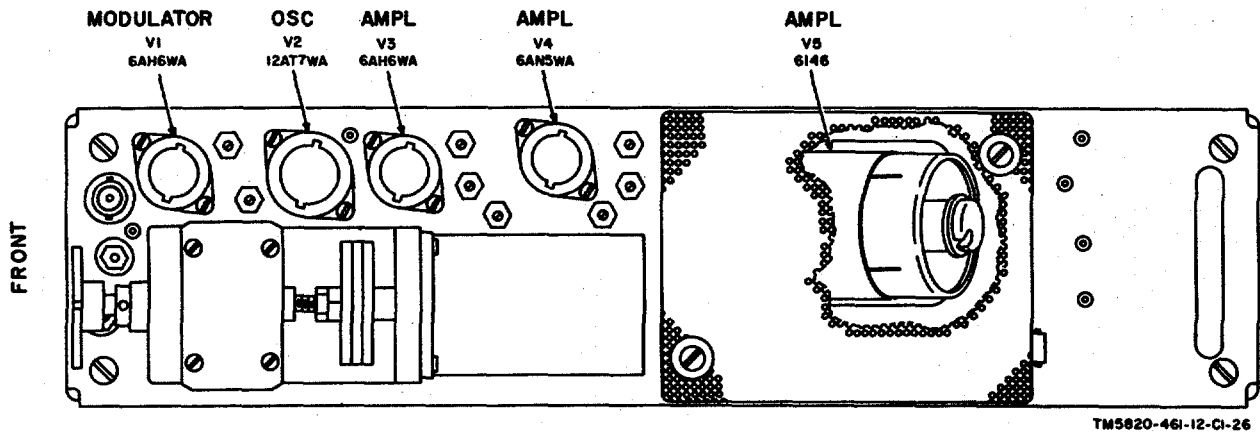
Modulator assembly 2A5 (part of T-893(P)/GRC), tube locations.
